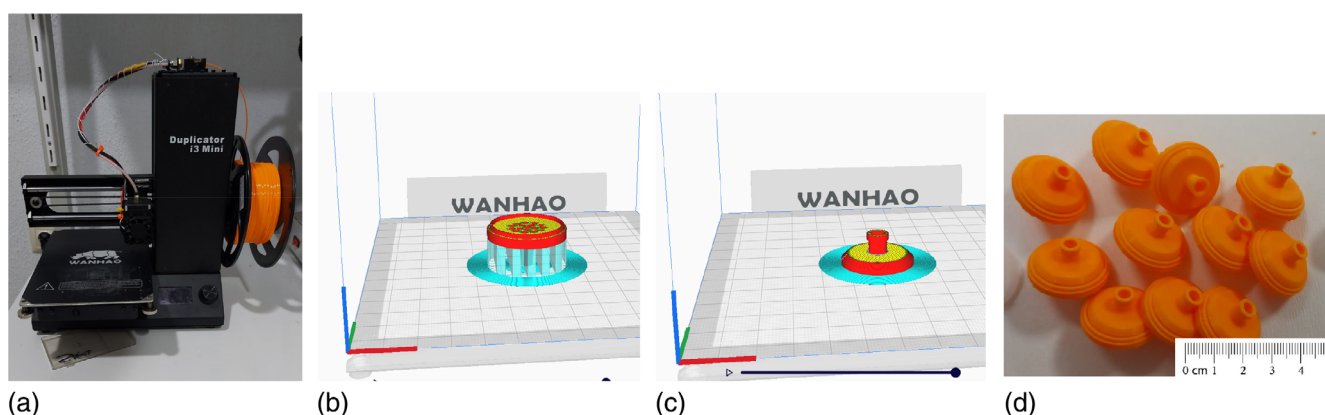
(a) 3D printer with PLA filament, (b) lower (c) upper housing part, (d) printed syringe filter with a membrane. [Color figure can be viewed at [wileyonlinelibrary.com](https://onlinelibrary.wiley.com)]
